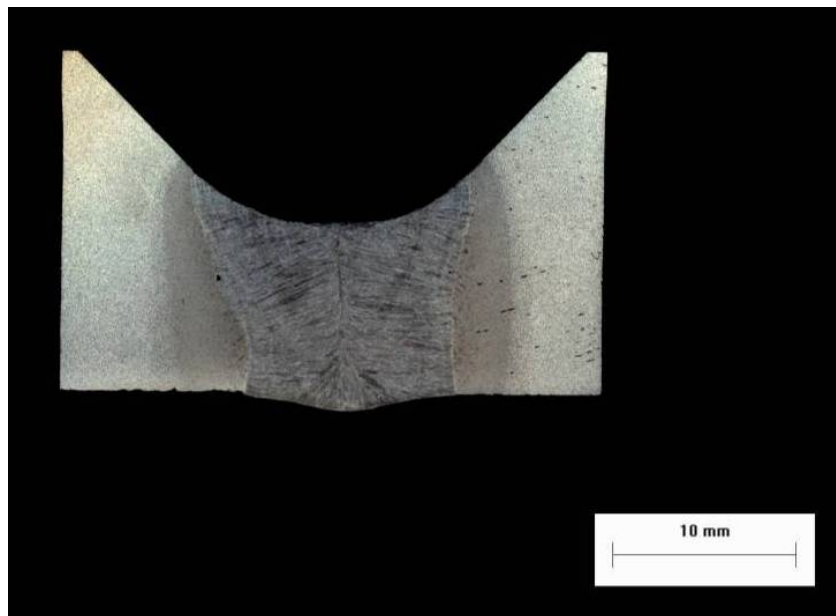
Macrograph of Weld on 1-in. Thick Butt Joint
